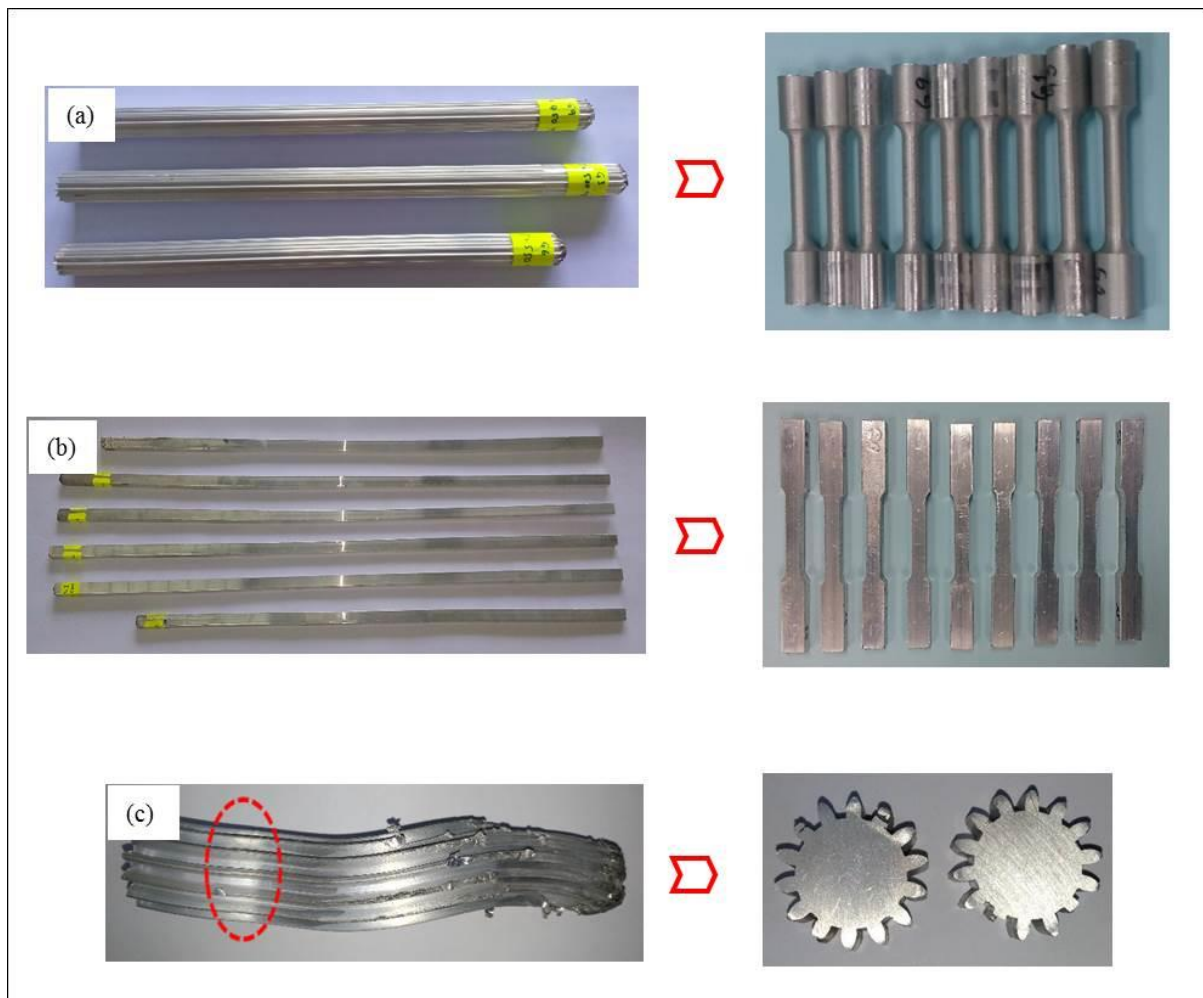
Extruded profiles converted to tensile samples (a) Spur gear ($ER = 4.86$) cut to cylindrical dog-bone, (b) rectangular shape ($ER = 11.22$) cut to plate dog-bone; (c) extruded profile of large spur gear ($ER = 2.16$) cut to gear shape
